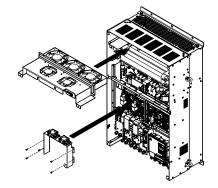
Install the Cooling Fan Unit: 4A0414 to 4A0590
